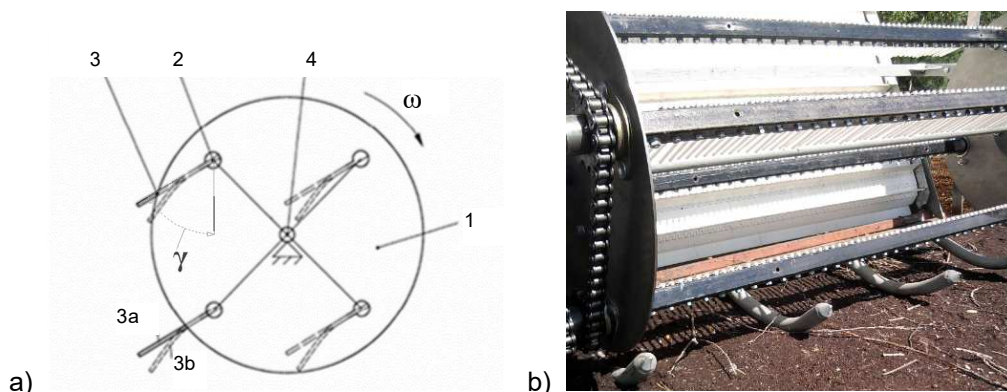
The blueberry harvester's picking reel: a) the principal schematic; b) prototype, with 1 – picking reel, 2 – picking rake, 3 – rake tooth, 3a – straight tooth, 3b – bent tooth, and 4 – spindle.
